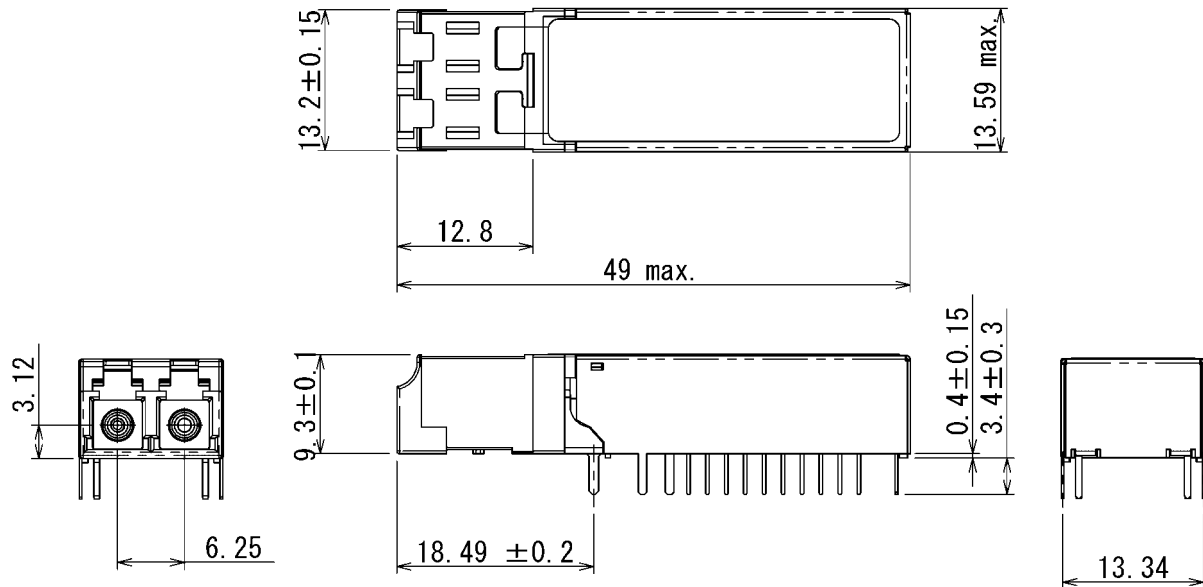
Outline Dimensions (SCM6378-GL-ZN)
